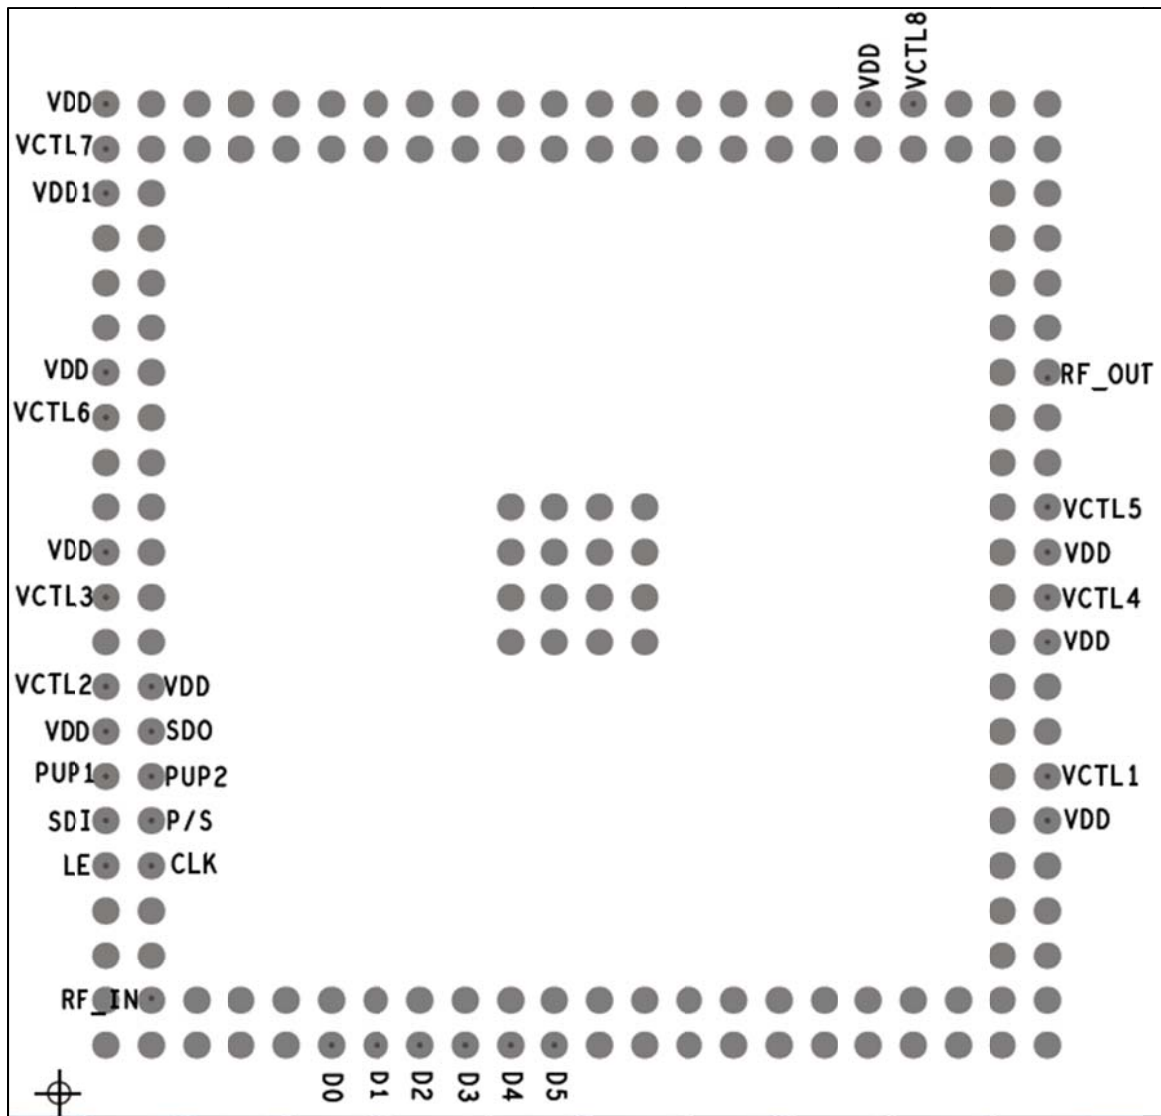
Bottom layout of the TTD version A that includes the input and output pins using BGA
